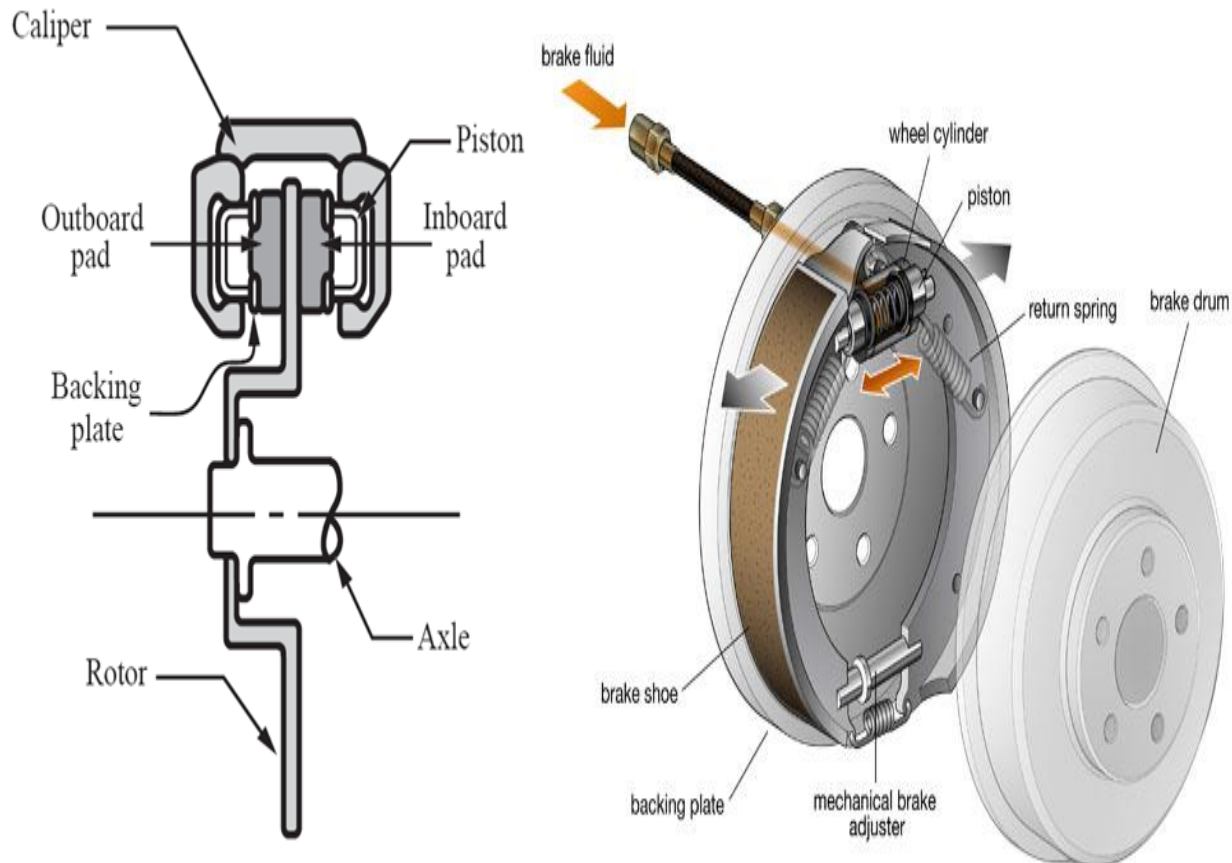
a) Cross-section of a simplified disc brake with a fixed caliper. The wheel is attached to the axle flange. (b) Assembling of drum brake
